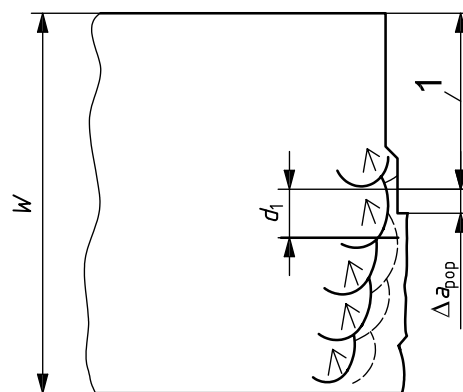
Post-test sectioning for identifying fracture initiation microstructure in a surface-notched specimen
